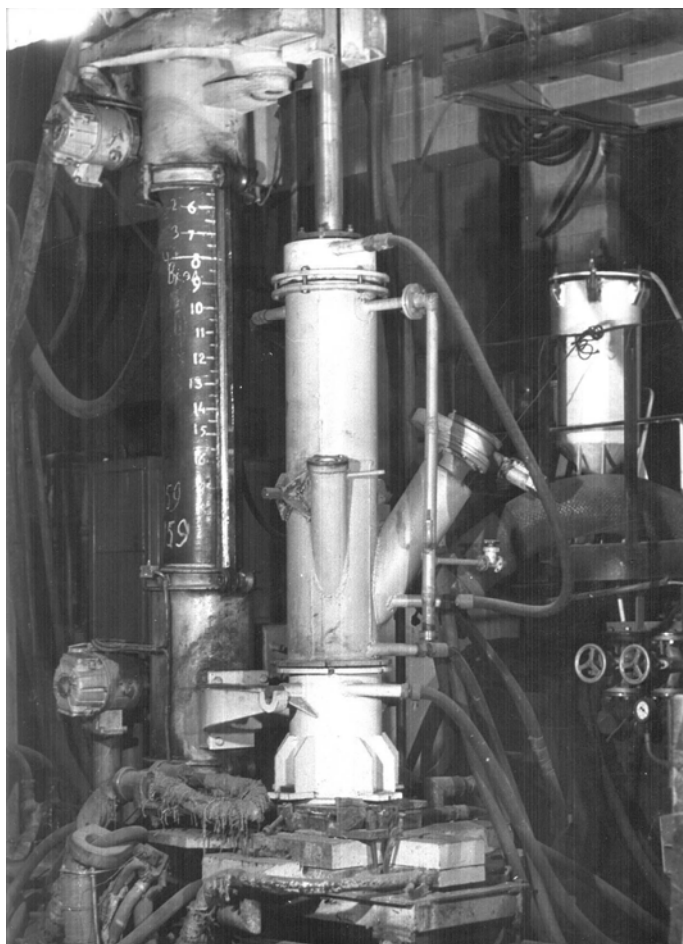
General view of chamber ESR furnace, manufactured on the basis of industrial unit U-578.
